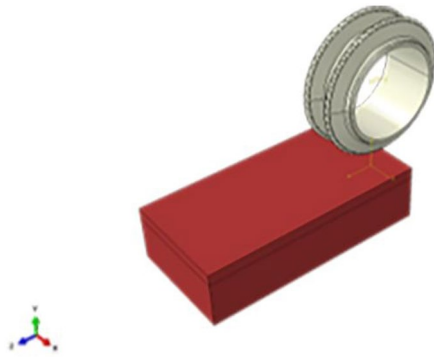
Schematic diagram of the assembly of a double-edged inserted-tooth disc cutter.
